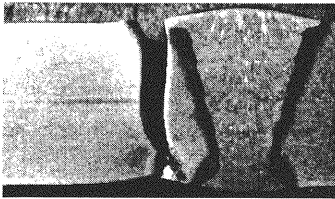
Summary of failure specimens with fatigue crack originated from weld toe
